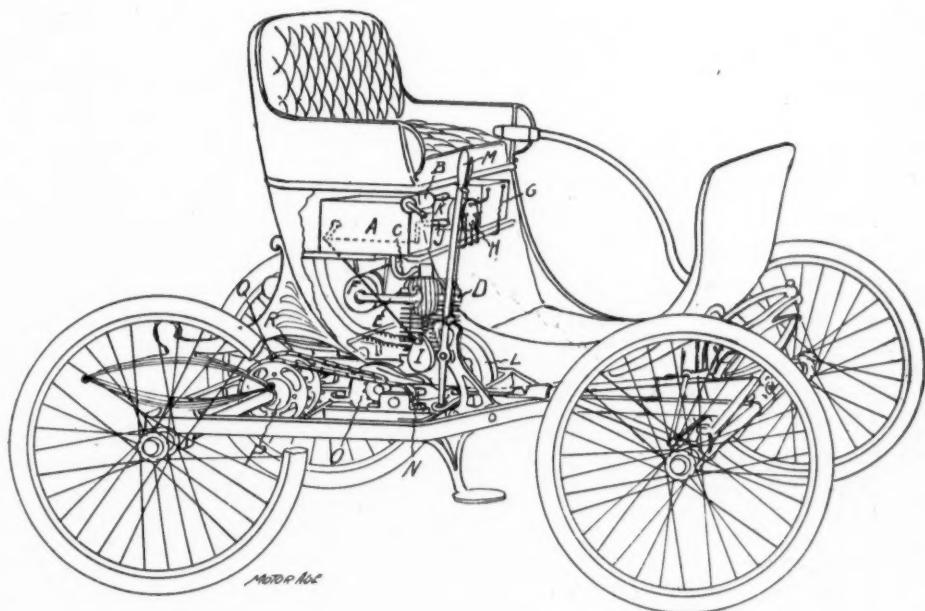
A GASOLENE VEHICLE, SHOWING DETAILS OF THE MECHANISM.
